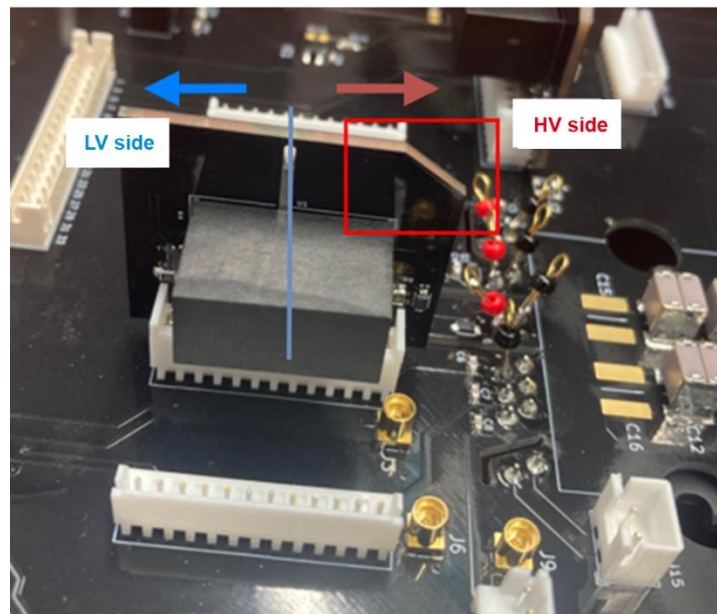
Direction of the gate driver board (the chamfer framed in red is to be placed on the HV side)
